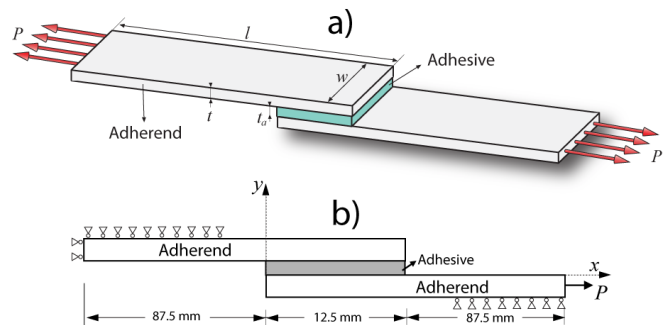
a) Three dimensional single lap joint, b) Boundary conditions and geometric dimensions of bond joint.
